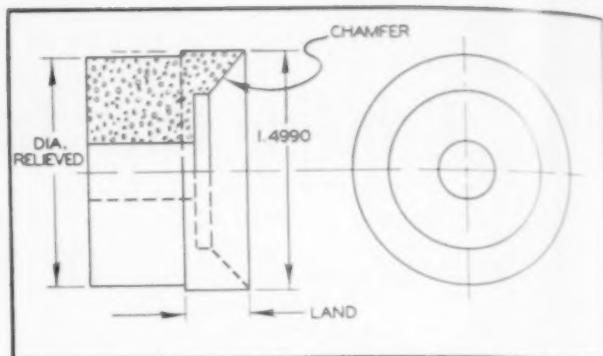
shows a standard grinding wheel dressed, relieved and chamfered to permit straight side grinding of the cam track
